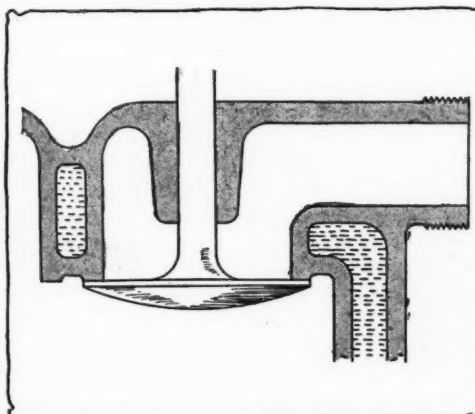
The entire seat of the overhead valve can be directly cooled by waterjackets
